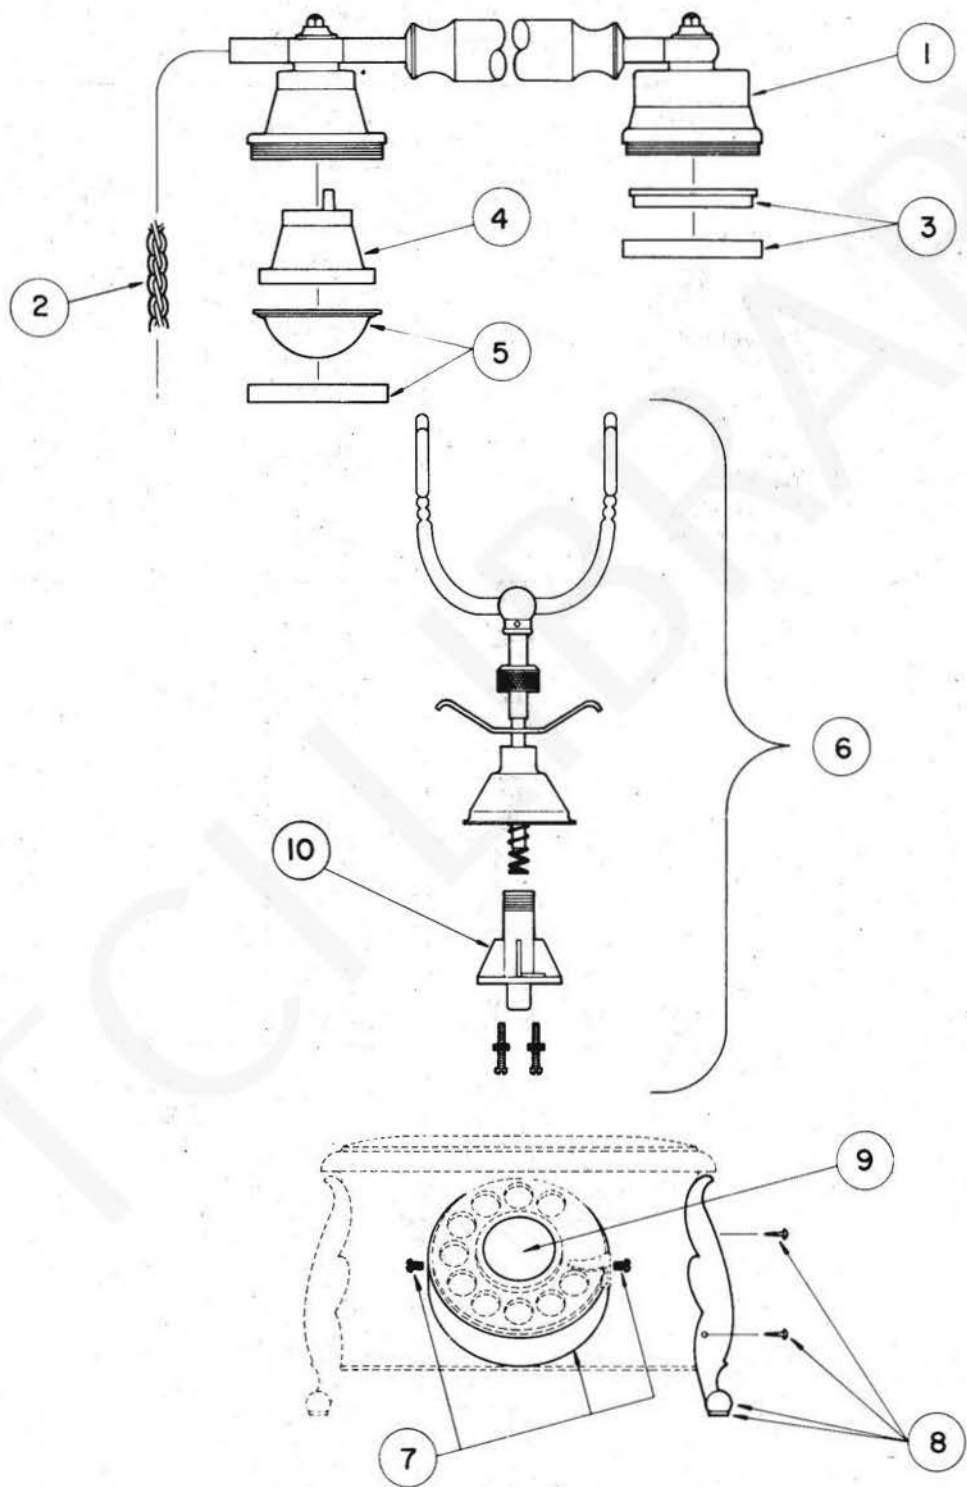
Exploded View of MD9150 Telephone Set (Renaissance)
